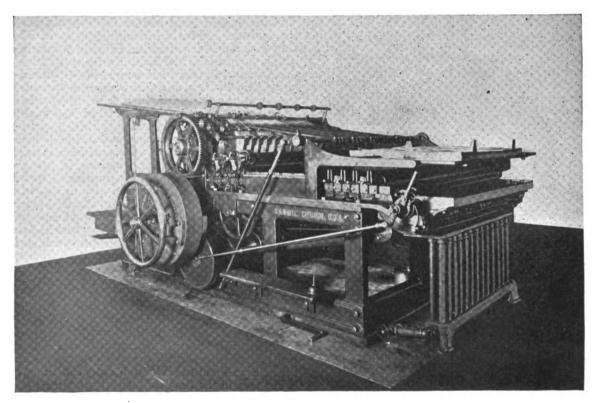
CARD ELECTRIC MOTOR DIRECT-CONNECTED TO MIRHLE PRINTING PRESS.
